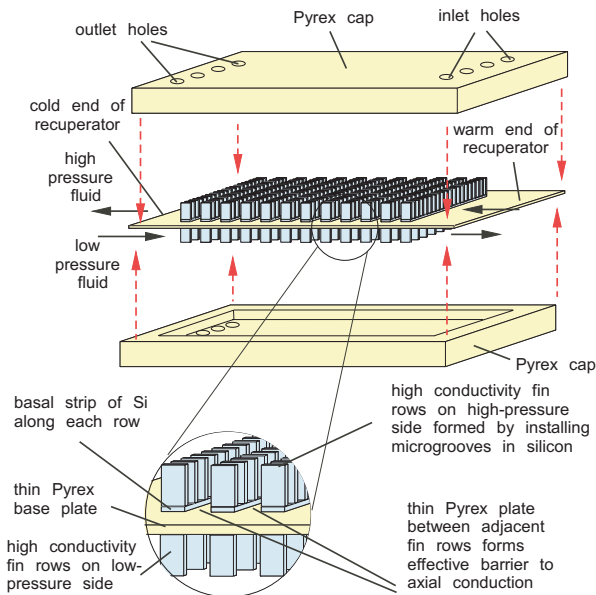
Exploded schematic of the recuperator showing the magnified fin structure in an inset.
